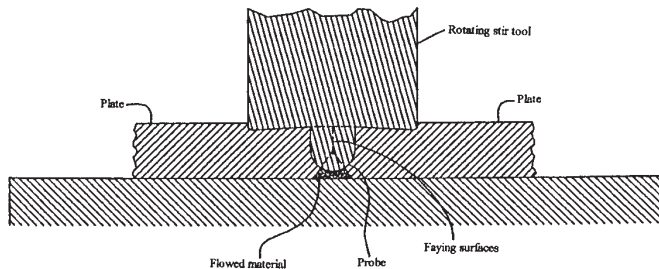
Friction stir welding tool for welding variable thicknesses
